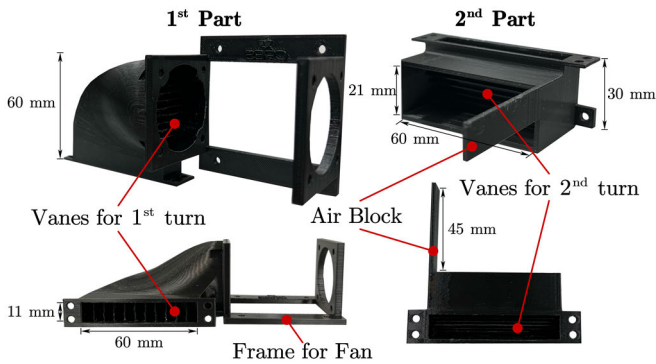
AD-IVB is 3-D printed into two parts to show the internal vane design.
